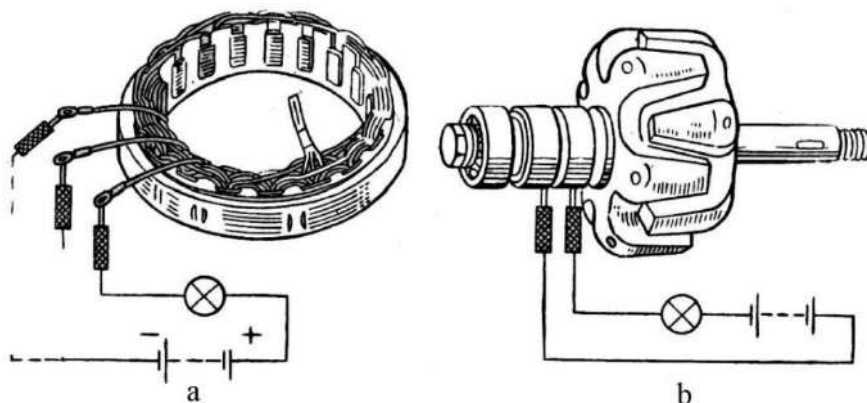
Continuity testing of winding of stator (a) and rotor (b)
